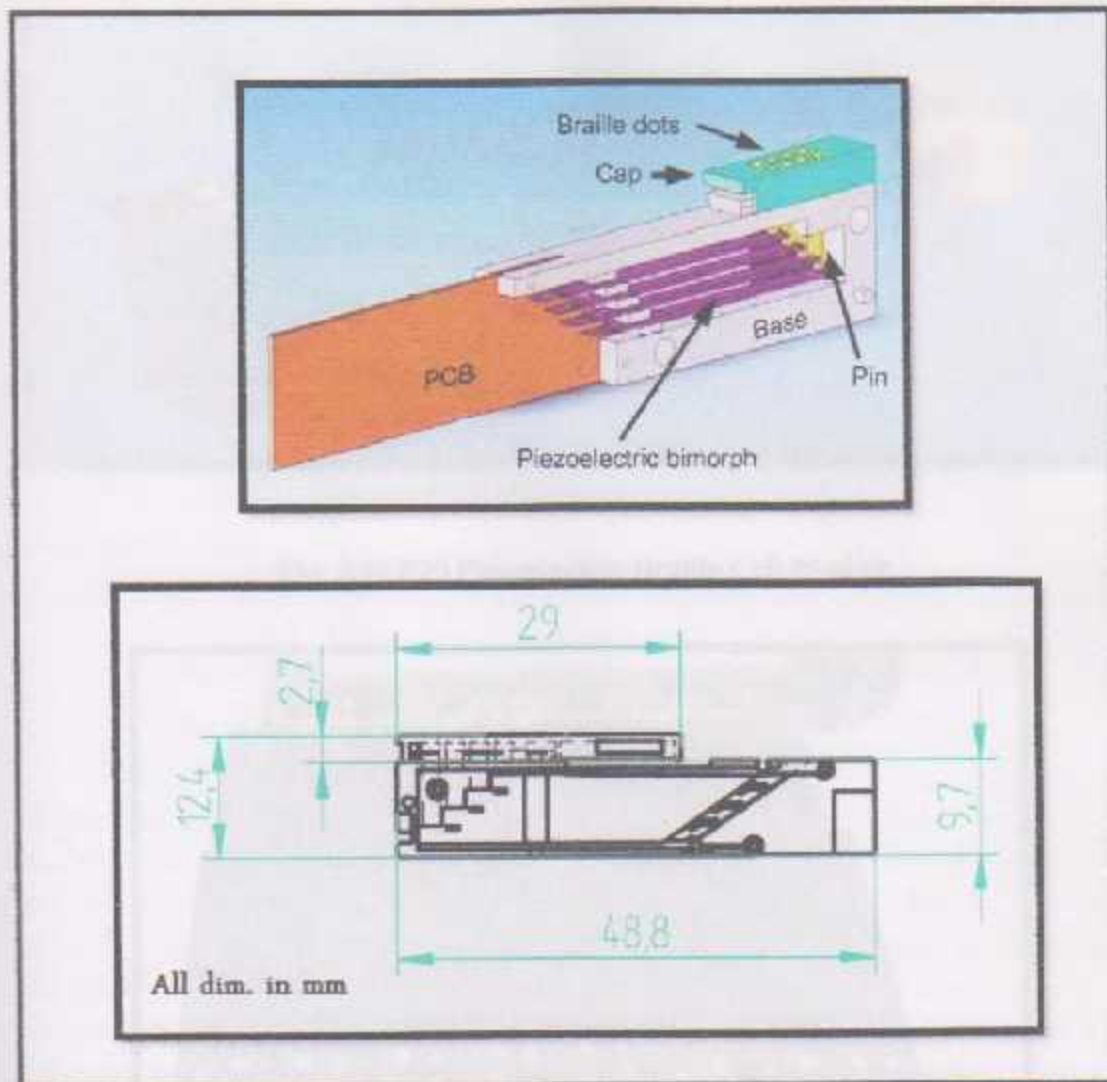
Assembly drawing of the Piezoelectric Braille Cell
